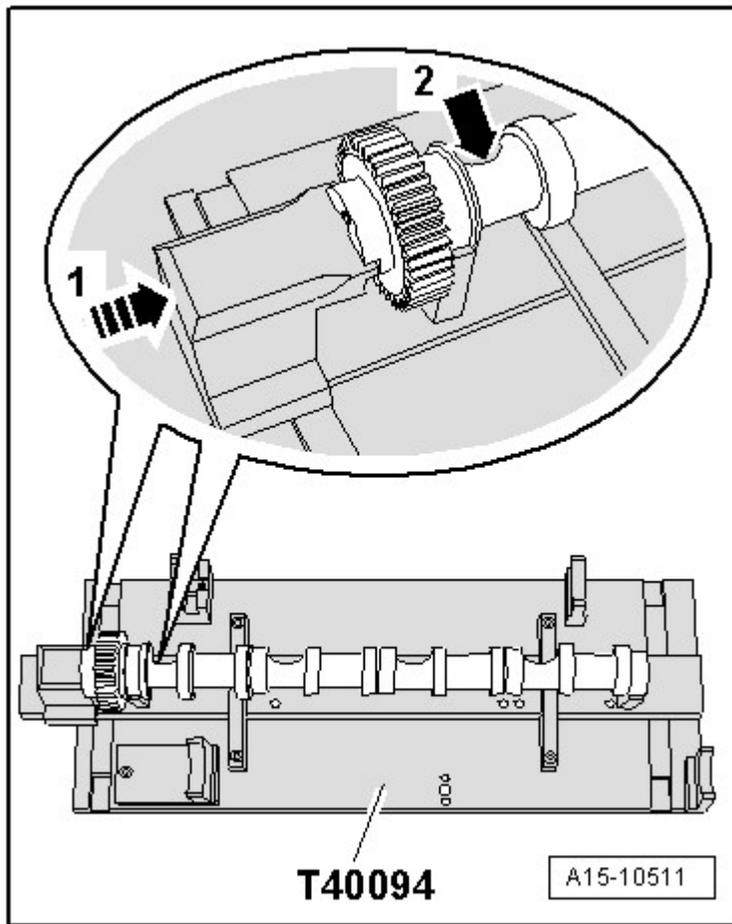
Installing Intake Camshaft Into T40094/1 And T40094/2
